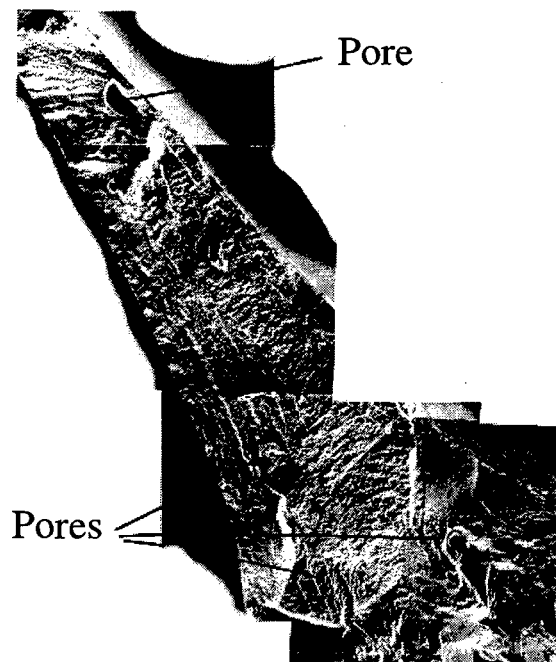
Fractograph showing pores at fatigue crack initiation sites
